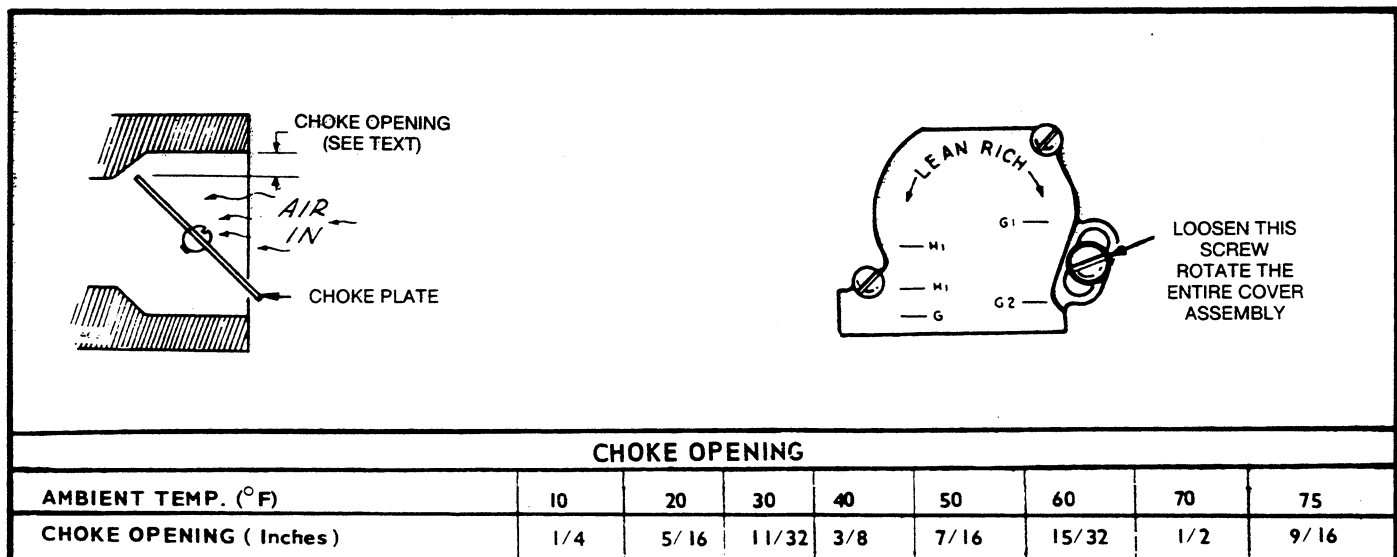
THERMO-MAGNETIC CHOKE SETTING
